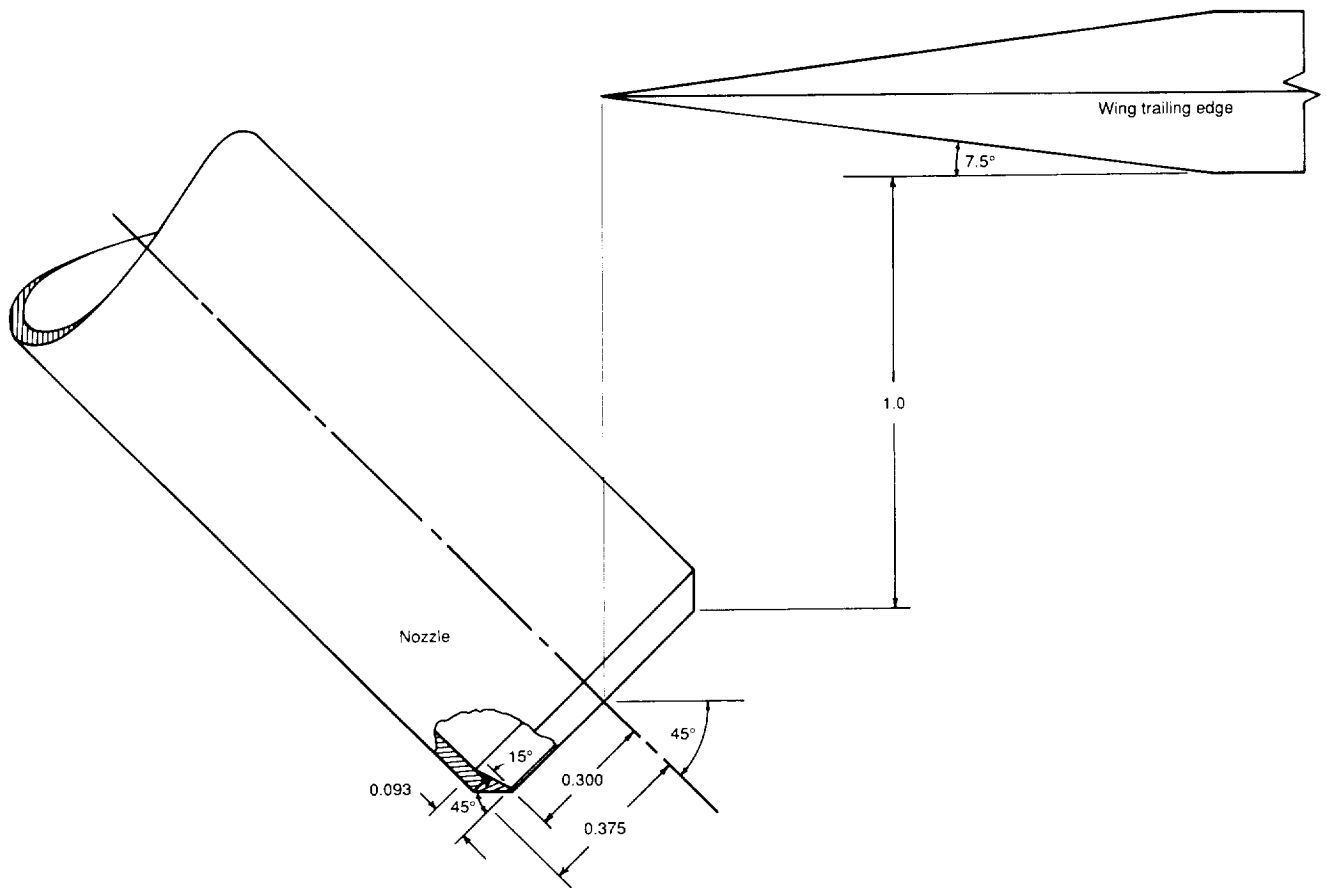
Cross section and relative position of the convergent nozzle used in the 60° delta wing test.
